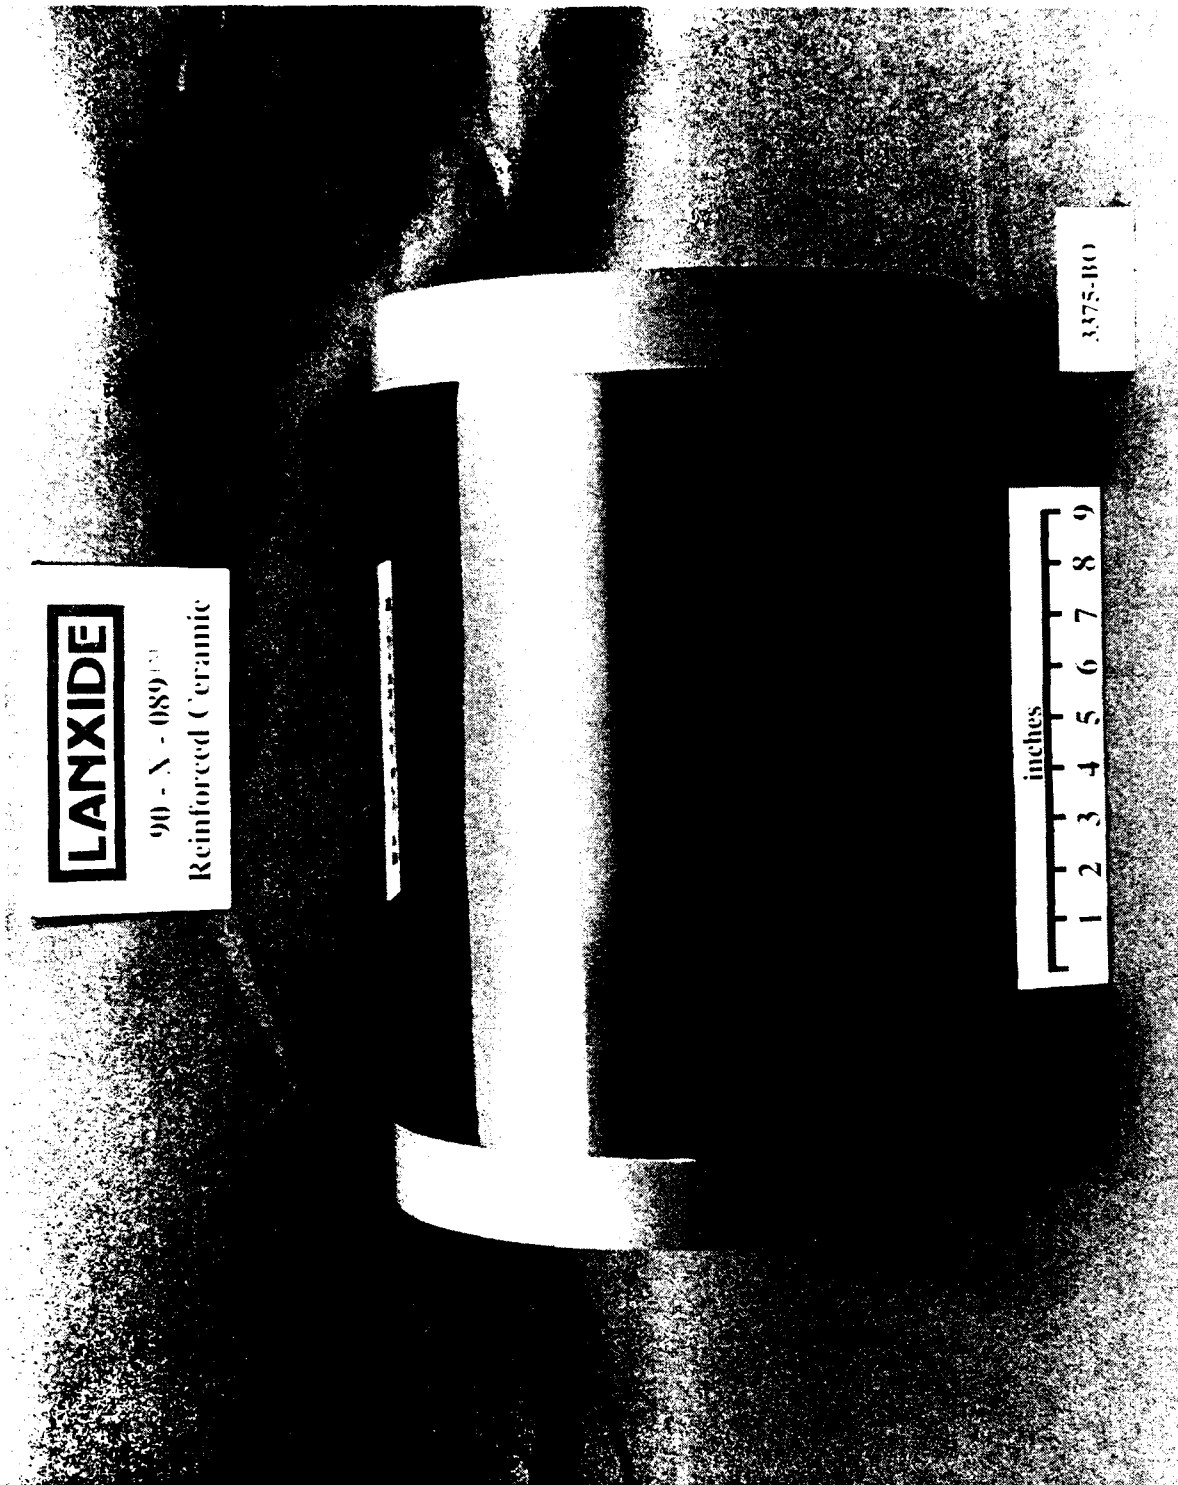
"As-cast" cylinder with Technicote, epoxy coating per WS22351, Rev C.
